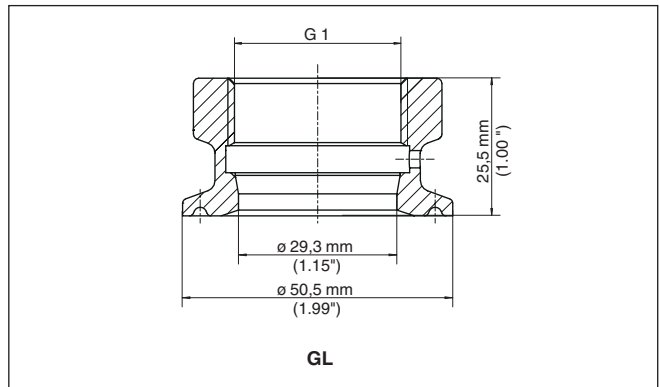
Dimensions of threaded adapter G1 (DIN 3852-X) on Clamp 1½" (DIN 32676, ISO 2852) PN 16
